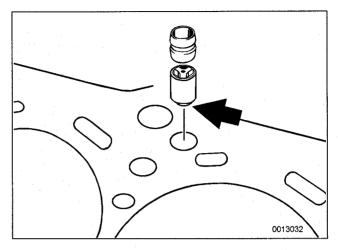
Oil feed check valve and spacer used on M42 engine. Install check valve with collar (arrow) facing down.
